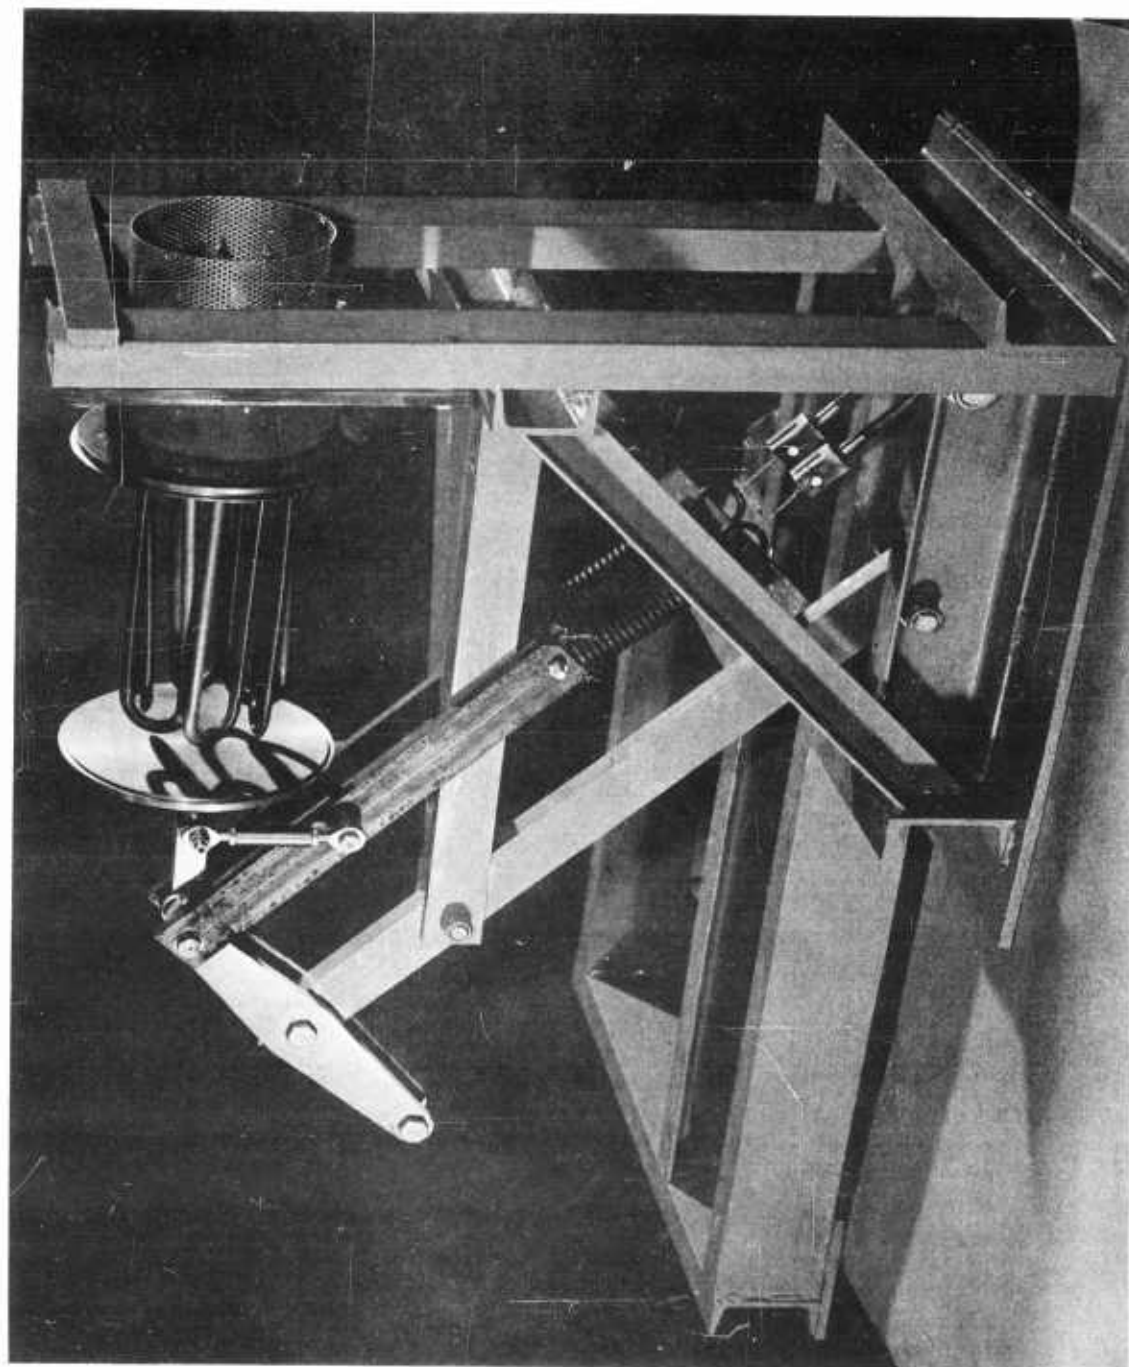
Fixture for Articulate Duct Outboard Seal Test with Electric
